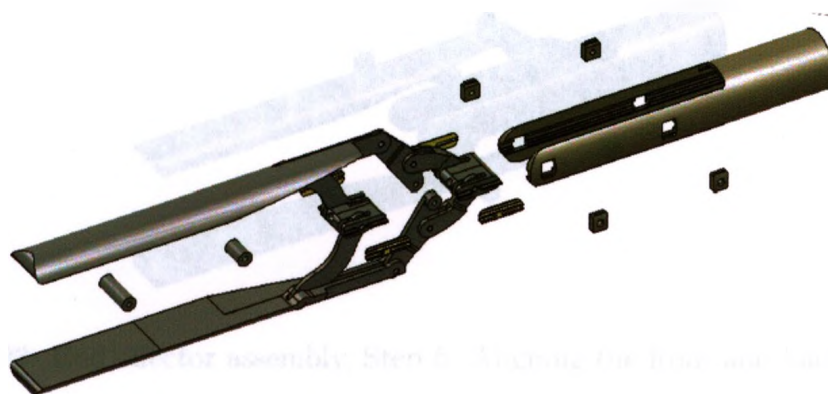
End effector assembly, Step 3: Connecting the jaw-linkage assemblies to the sliders.
